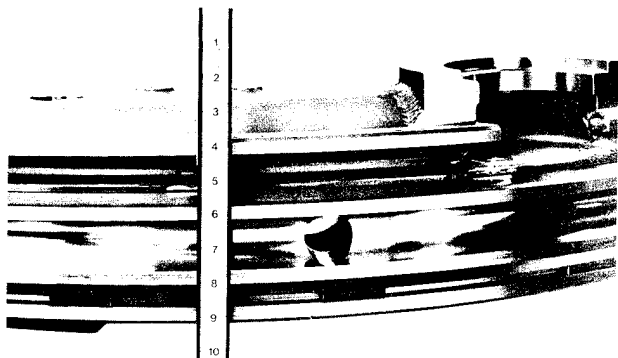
Inner Race Insert Band Showing Loading Plug Hole. To the right is the pinion drive cavity.
